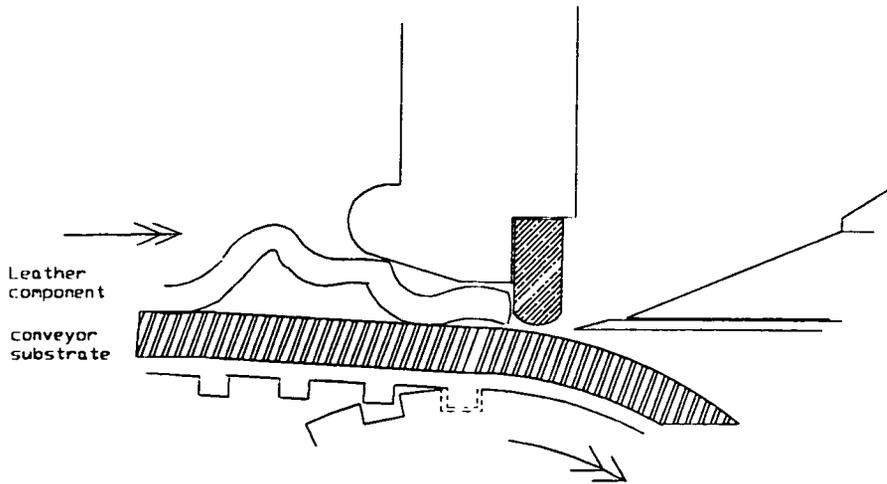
The cause of component jamming and failure of leading edge skiving
